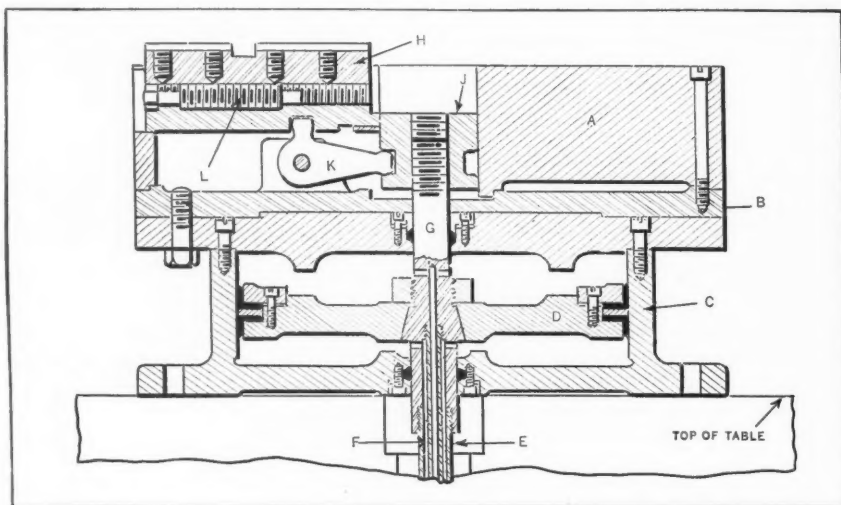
Air-operated Chuck Designed for Installation on a Vertical Turret Lathe
